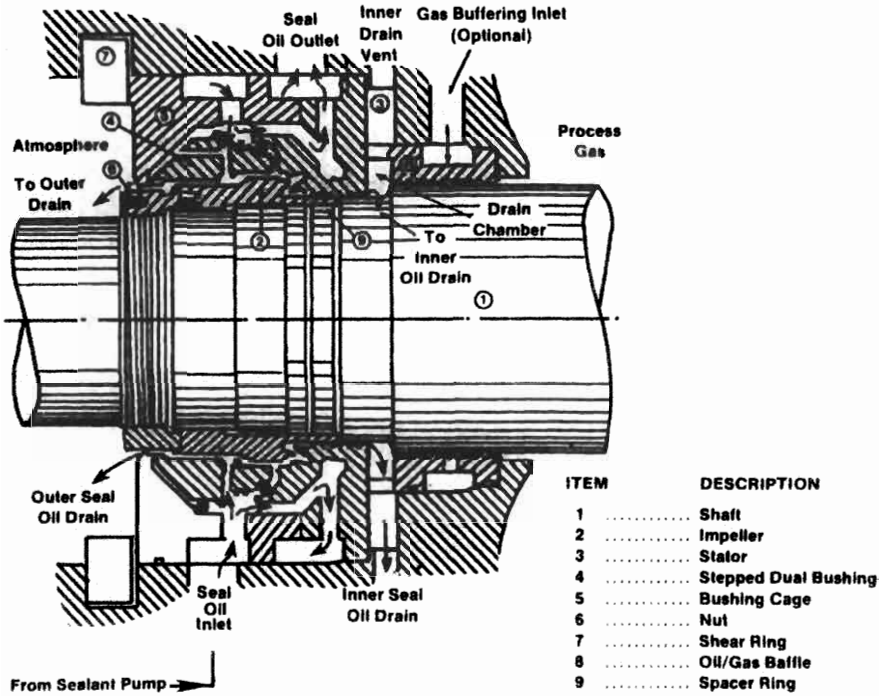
Liquid film type seal with pumping bushing. (Courtesy of A-C Compressor Corporation)
